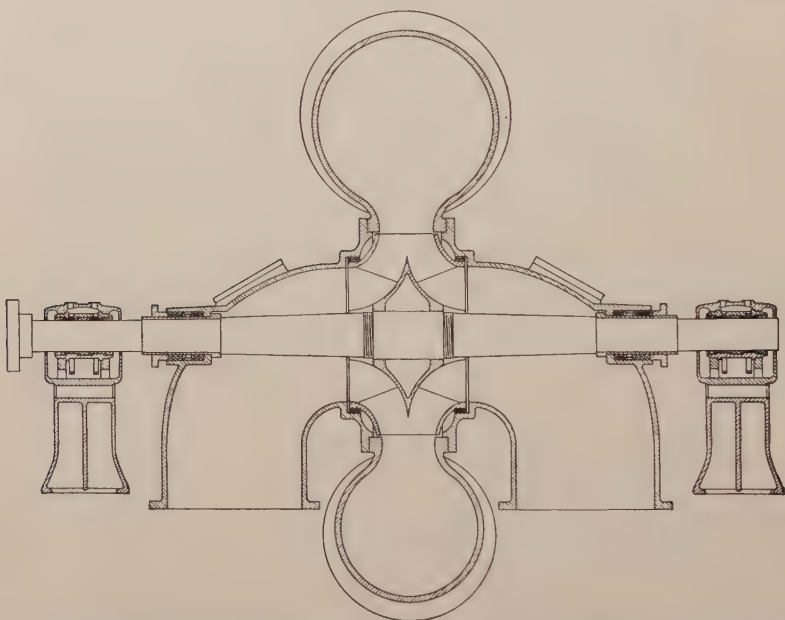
Cross section showing general construction of Worthington Double-Suction, Low-head Pump with outside Bearings. For irrigation work.
